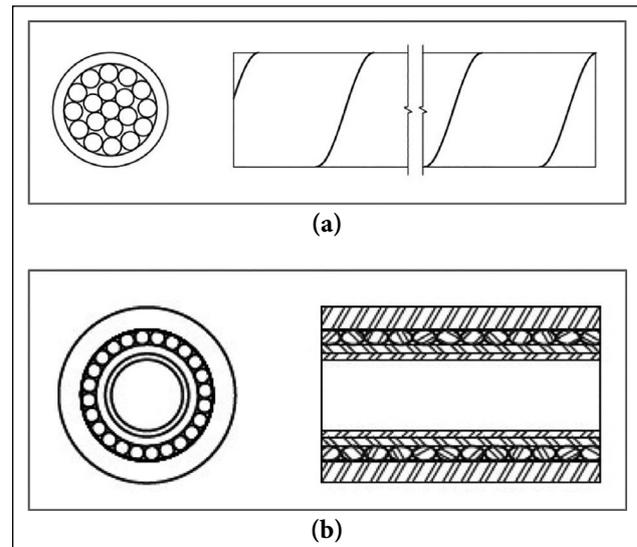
Sketch of inner cable and conduit; (a) 1x19 coiled armoured inner cable (b) PTFE coated, steel braided and PVC coated conduit.
